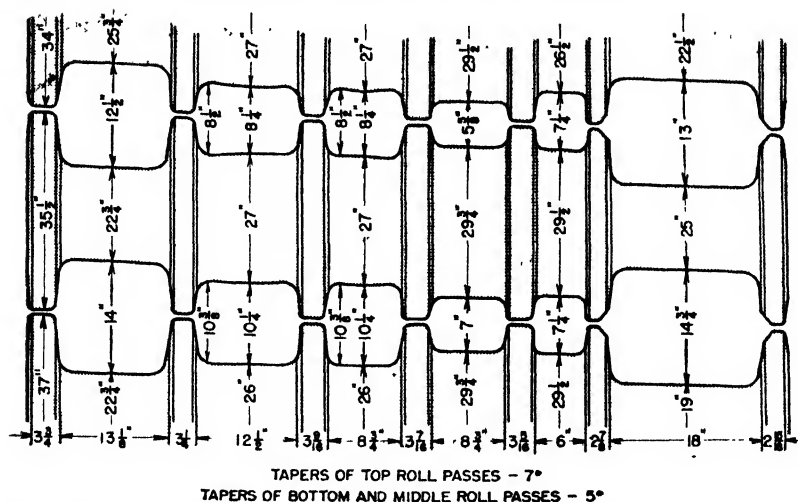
Schematic representation of rolls for a three-high, single-purpose mill. Only part of each of the top and bottom rolls are shown, sufficient to indicate the shape and size of the pass openings. The diameters of the rolls in the various passes, however, are given, to fix the size of the top and bottom rolls.
